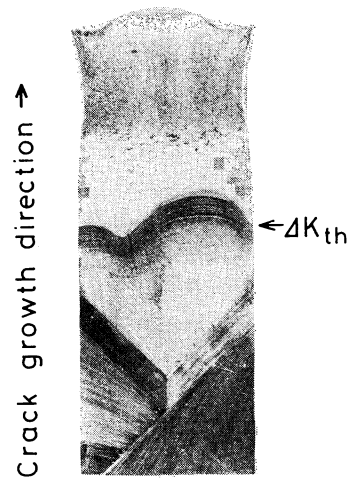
Fracture surface of CT specimen ( $B=25$  mm, weld joint).
